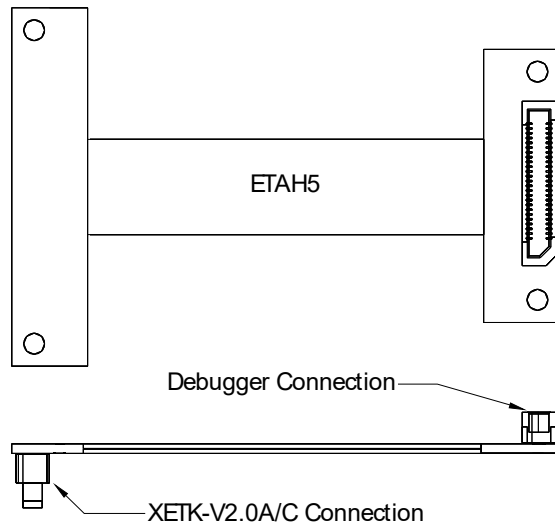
ETAH5 XETK-V2.0A/C - Debugger Adapter Cable
